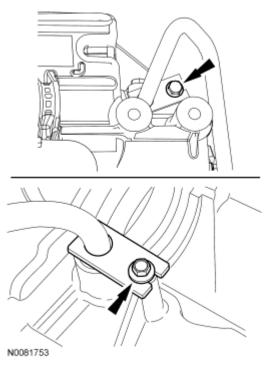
Transmission Fluid Cooler Tube Bolts Courtesy of FORD MOTOR CO.
